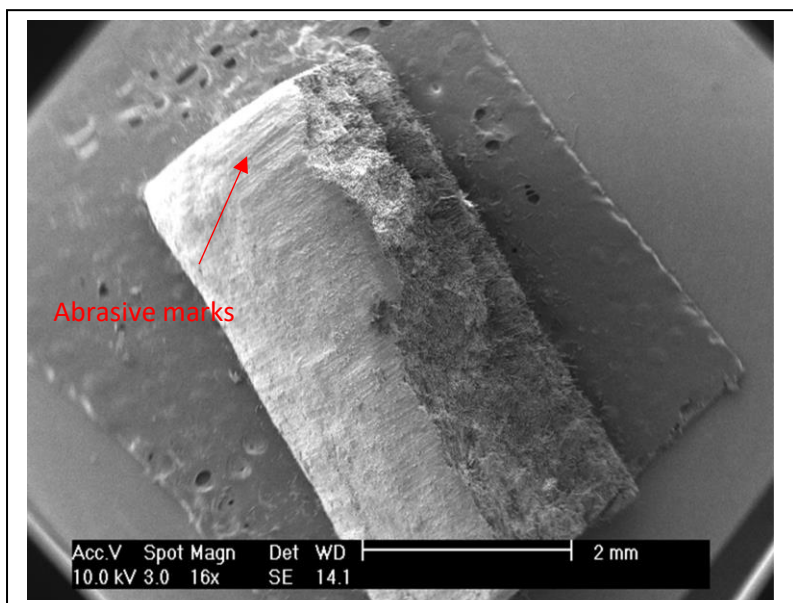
Abrasion marks on broken 65°C gear tooth.
